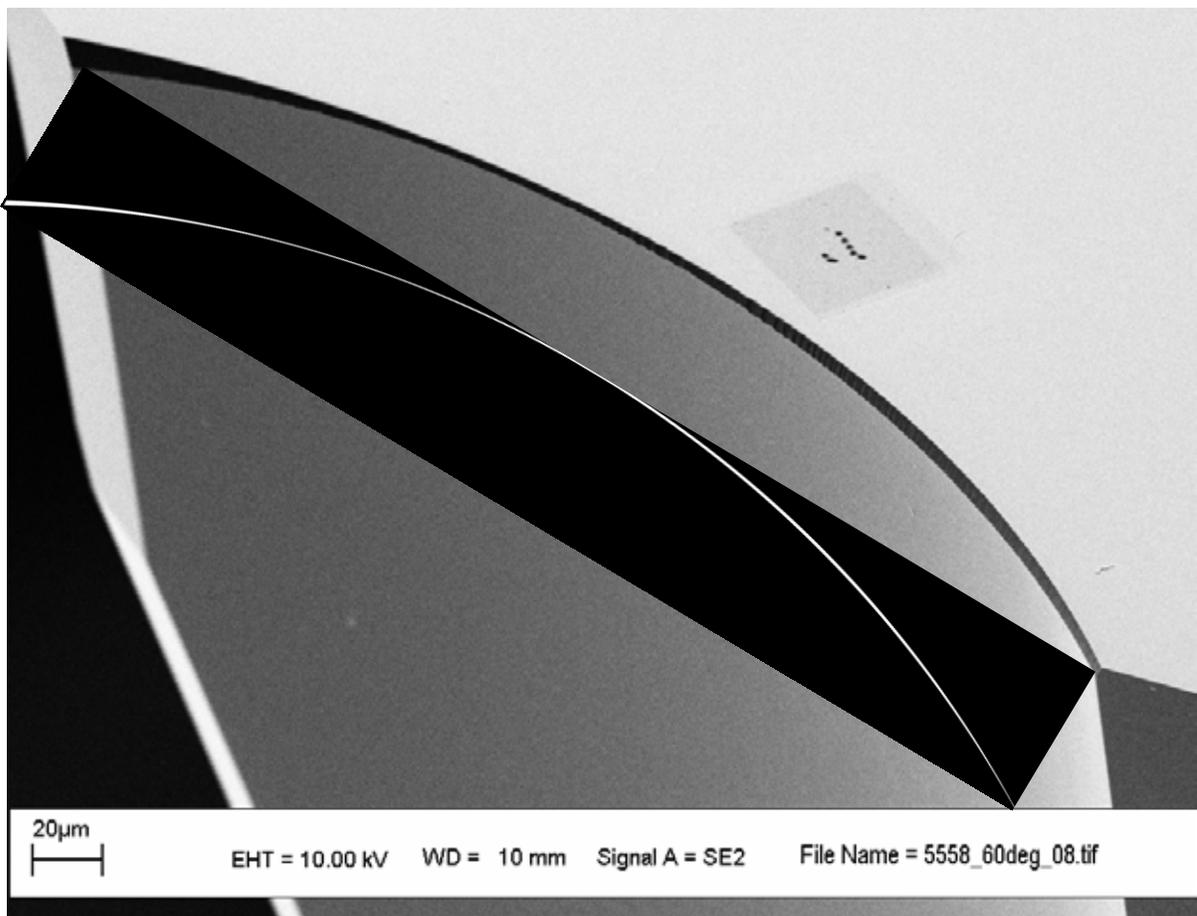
The FIB Modified Tool Edge is Shown with the Mask Overlayed. The FIB Modified Edge Shows as a Dark Band Near the Edge of the Tool.
